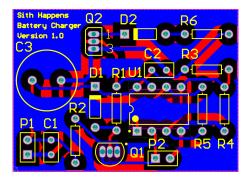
Bottom Layer of Battery Charger Circuit PCB
